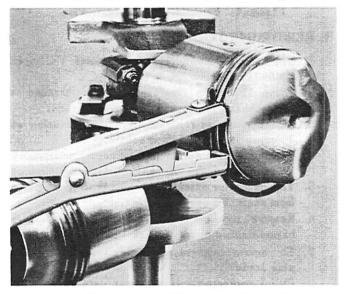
Removing (and Installing) Piston Rings January 1961 Section II - Powerhead
